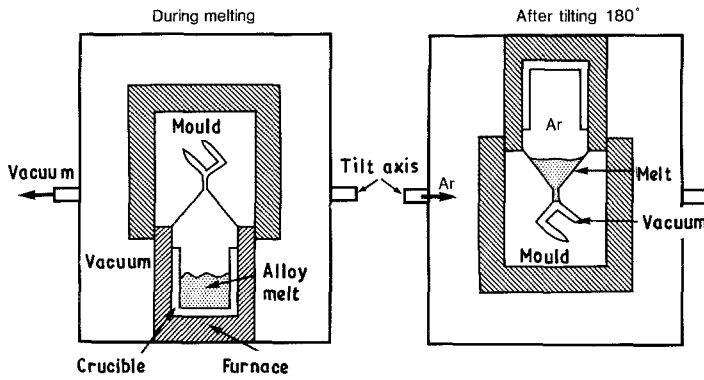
Schematic drawing of the applied vacuum-pressure casting machine.
